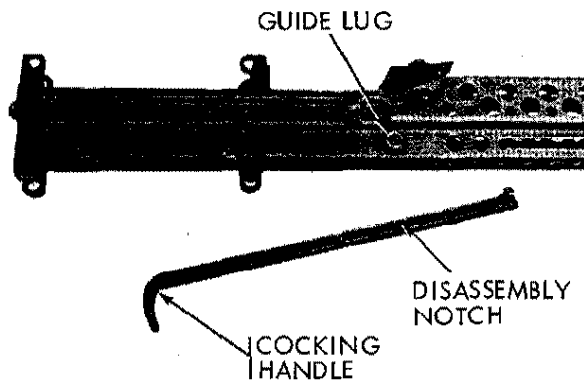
COCKING HANDLE GUIDE LUG AND DISASSEMBLY NOTCH
